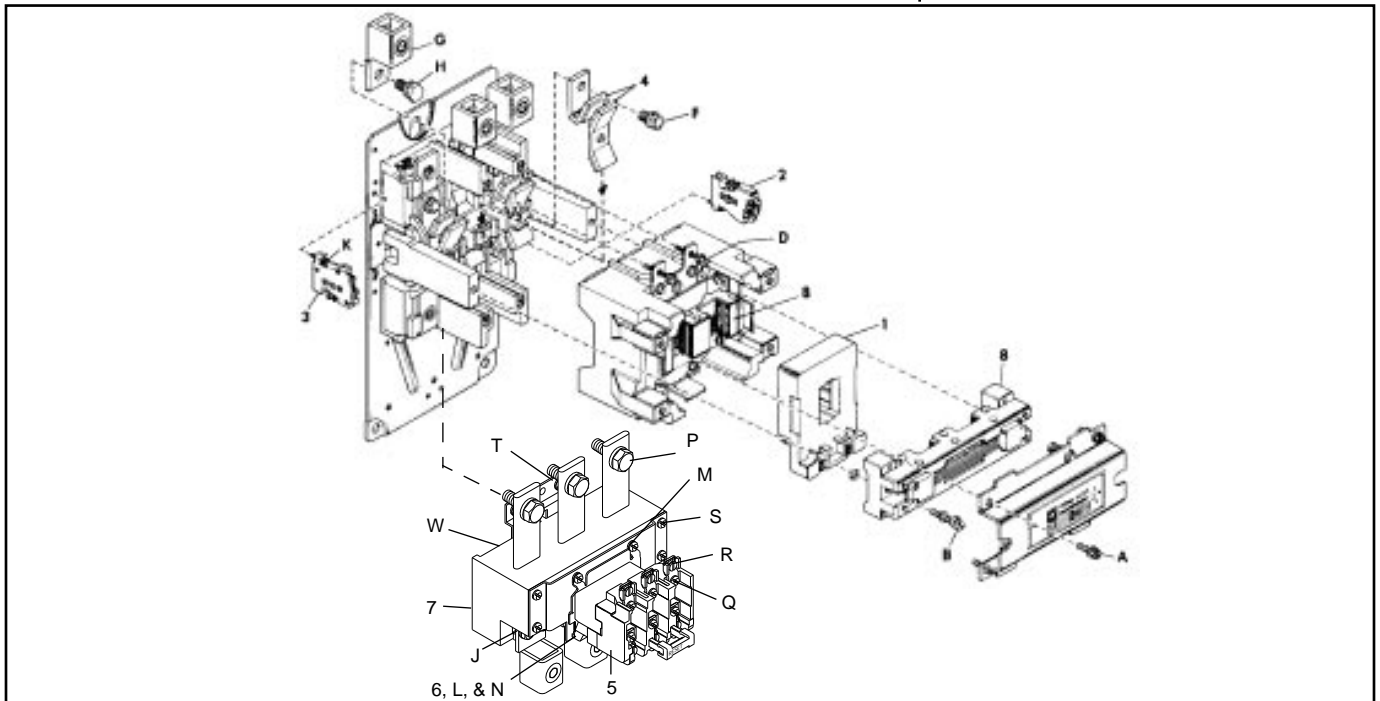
/ Figura 1 / Figure 1: Contactor and Starter Assembly / Montaje del contactor y arrancador / Assemblage du contacteur et démarreur
